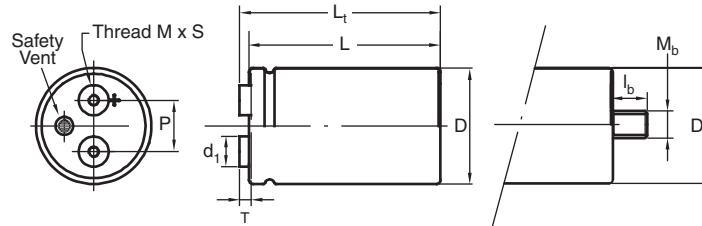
B: High current M6-18 mm disc and 1/4-28 UNF disc: Screw Terminal (ST) and Screw Terminal Bolt nut (STB)
